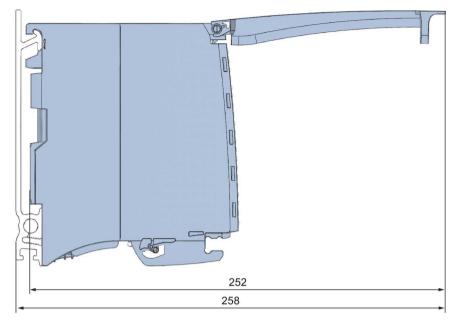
Dimension drawing of the DQ 16x24VDC/0.5A HF module, side view with open front cover
